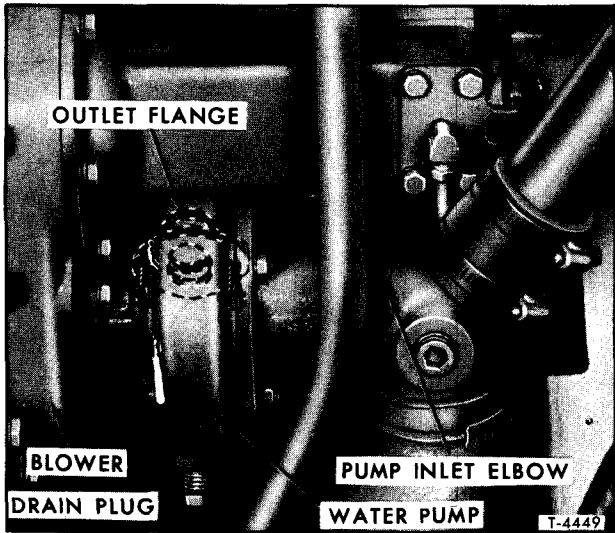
Water Pump Mounting (6-71 Engine) (Typical)
